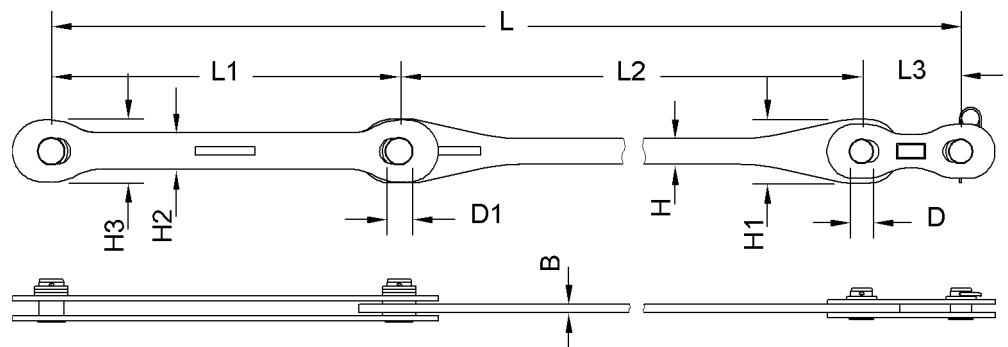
Dimensions of main boom pendant strap on 2821 boom head section
